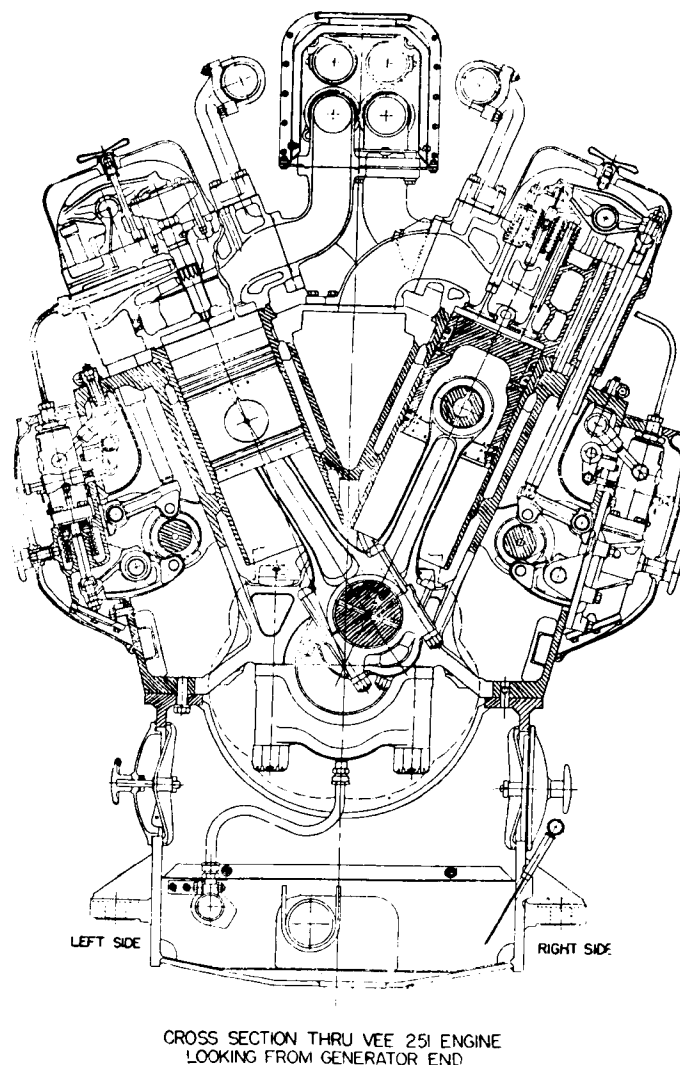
Cross section of the ALCO Model 251 Vee-type diesel engine
